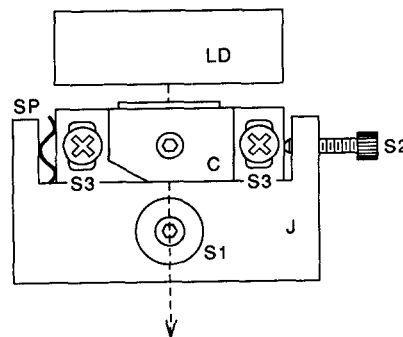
Jig usage in collimation. LD=laser mounting block (Fig. 2), C=collimating lens mount (Fig. 3), J=alignment jig (Fig. 3). SP=spring or rubber pad to provide a restoring force against adjusting screw S2.
